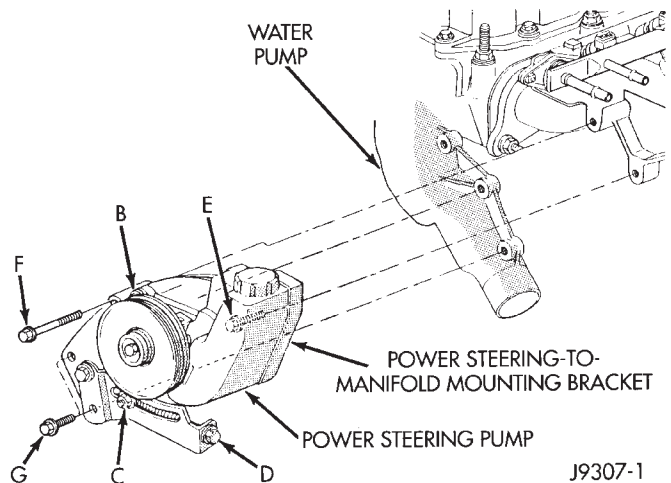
Bracket Mounting Bolts—4.0L Engine
